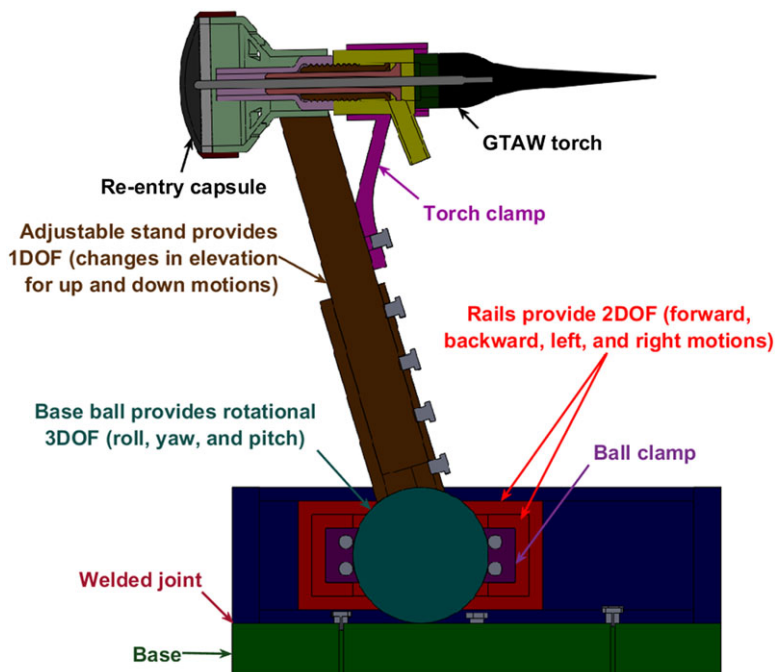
Sectional view showing improved operational capabilities for the NGEM (see Appendixes for details).
